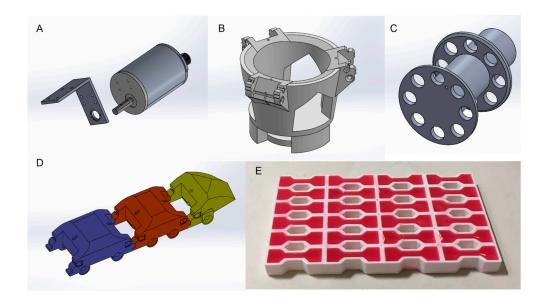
Components of the gripper. (A) Waterproof motor canister with attachment for the palm. (B) Hollow palm. (C) Pulley. (D) Finger made of three phalanges with slots for bow-tie joints, tendon, and springs. (E) Bow-tie joints before demolding.
